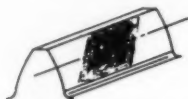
SHOWS THE CONTACT OF A 5° R.H. LAP WITH A SPUR GEAR TOOTH
